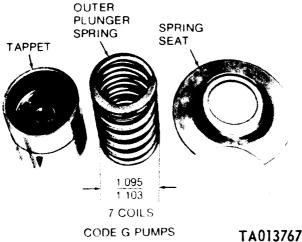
Identification of tappet, outer plunger spring and spring seat.
